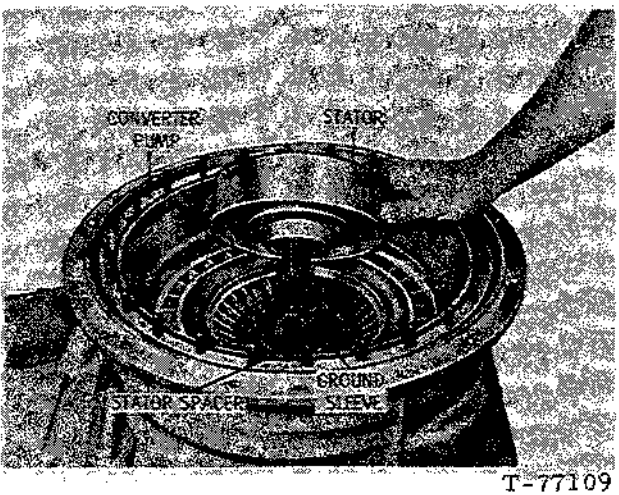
INSTALLING TORQUE CONVERTER STATOR
